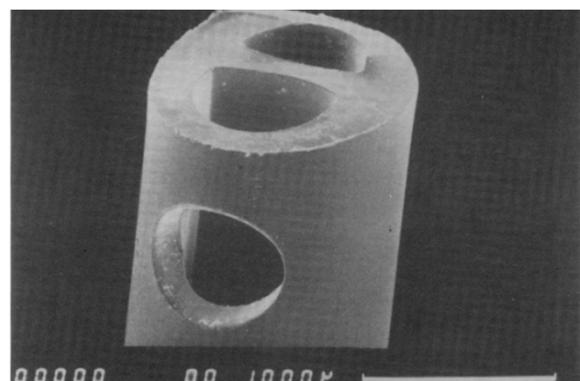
0.7 mm diameter hole for blood passage drilled with a laser [21]
